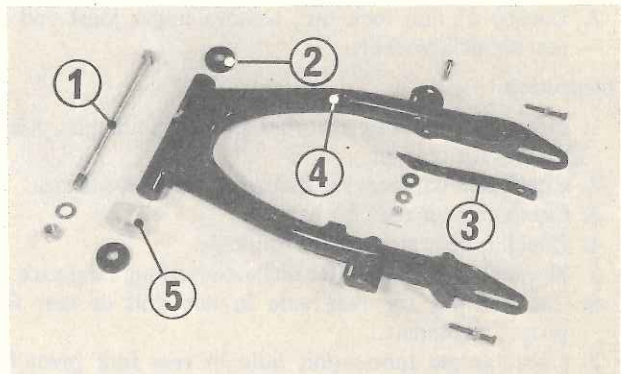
(1) Rear fork pivot shaft (3) Rear brake stopper arm
